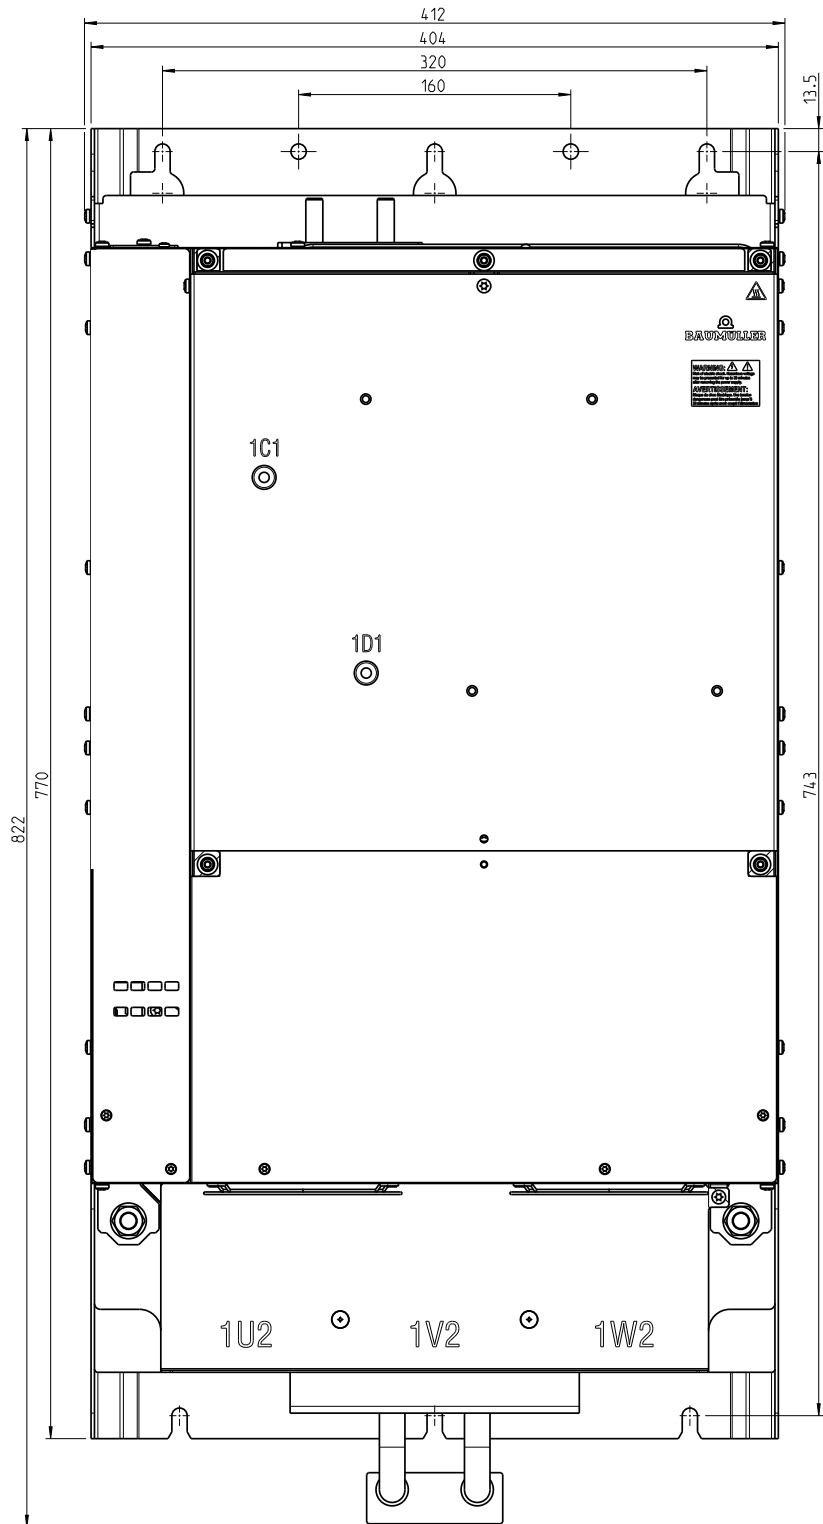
Drilling pattern BM656X/BM65FX-ZXXXXY customer version
